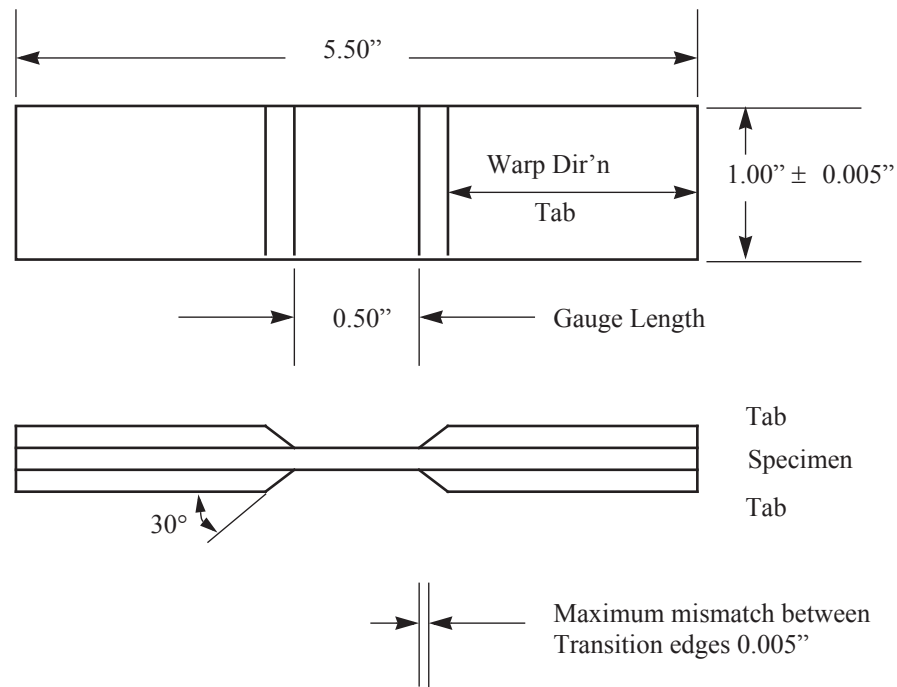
COMPRESSIVE TEST SPECIMEN
